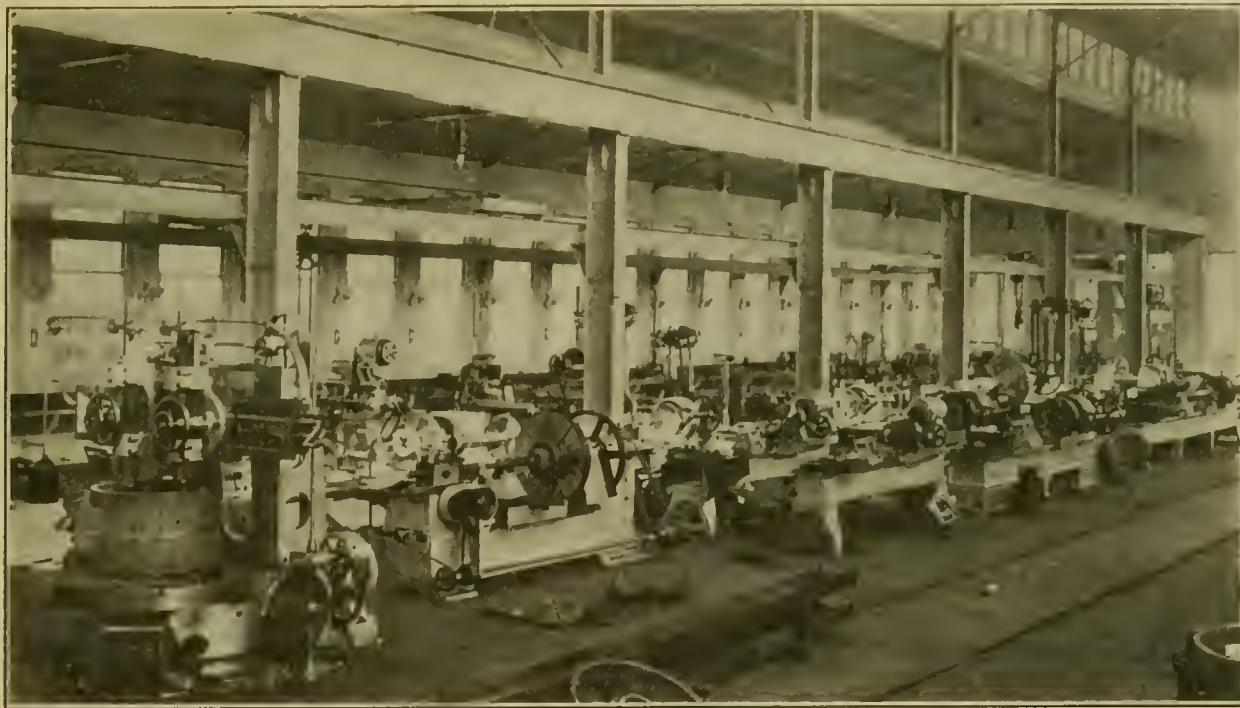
A MODEL MOTOR-DRIVEN MACHINE SHOP.—WORKS OF THE BULLOCK ELECTRIC MANUFACTURING COMPANY.
